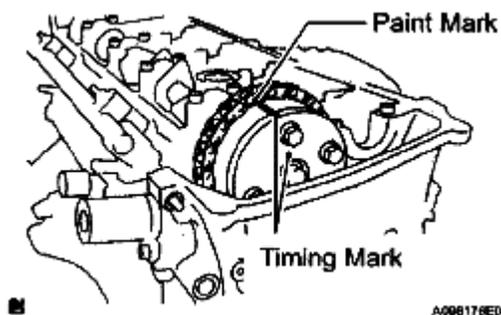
Identifying Paint Mark, Timing Mark On Camshaft Timing Gear
